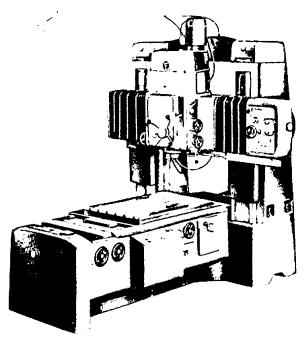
East Germany: Latest Jig Borer (SIP Type)
